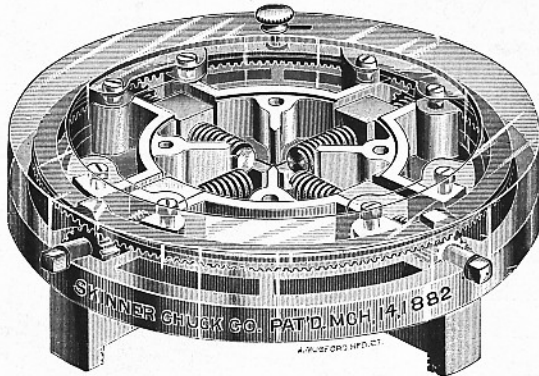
is a section of the Chuck showing end of screw and box C; also the strong and durable manner in which all the parts are secured to the body of the Chuck. All screws and the boxes carrying the jaws are made of the best cast steel, the wrenches and scroll rings of the best hammered iron, made especially for this work. The jaws are of steel and all wearing parts are thoroughly hardened.
